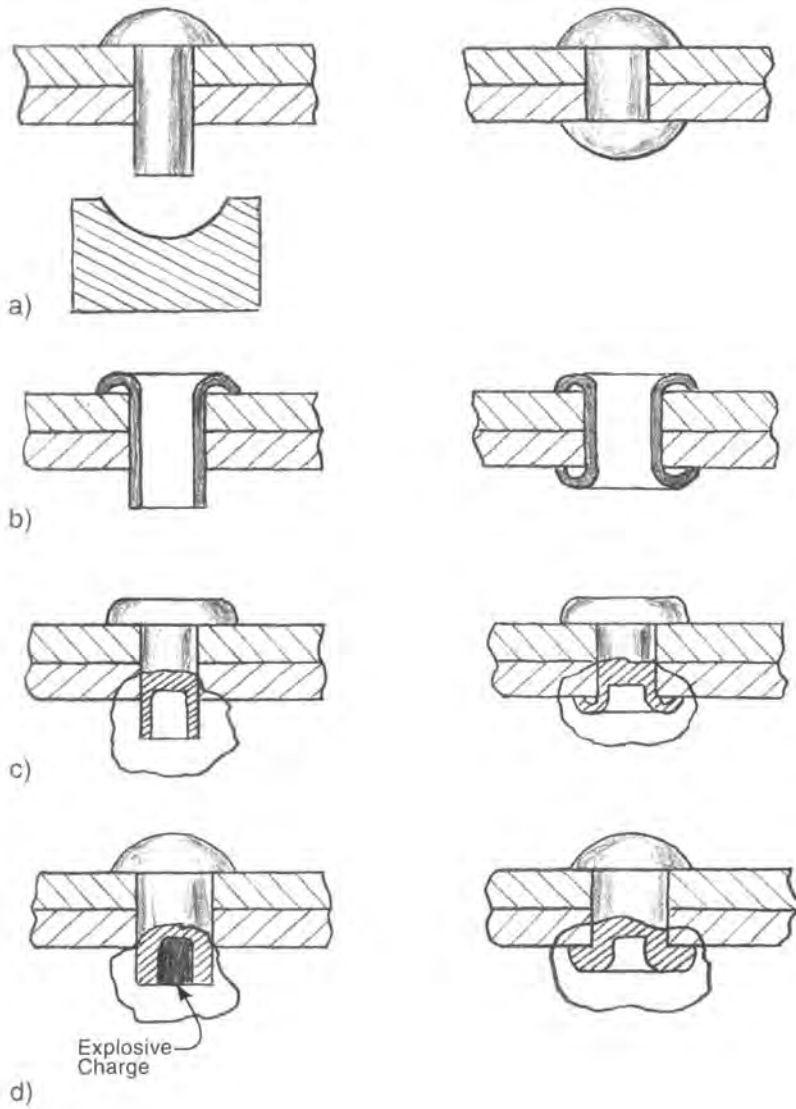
F4b Common rivets: a) solid, b) tubular (eyelet), c) semi-tubular, d) explosive.
